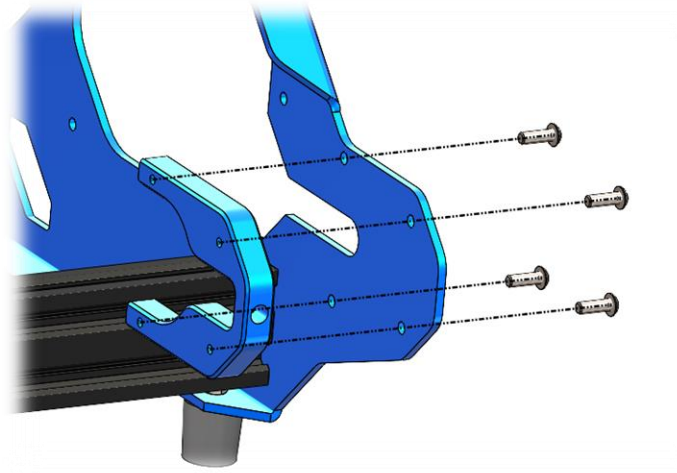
Installing CNC BELT tensioners plates on each corner of bottom frame using M4x12 screws
